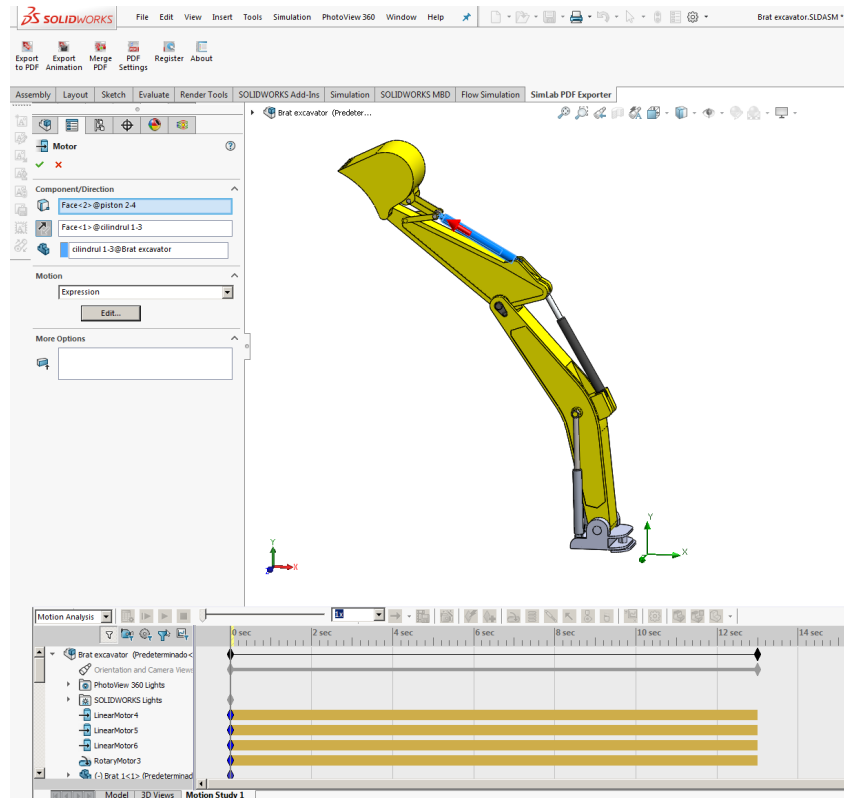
Attachment of the linear drive motor of the hydraulic cylinder for the motion of the excavation bucket
